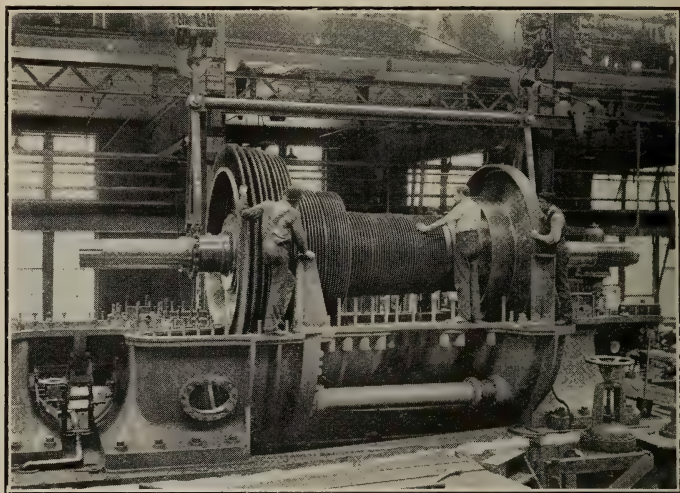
View showing rotor of 7,500 KW. being lowered into casing
